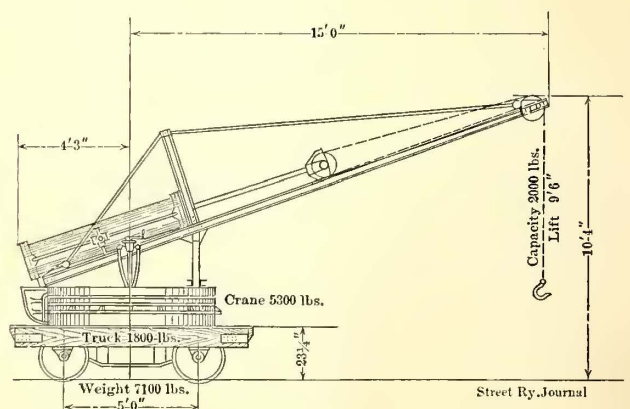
REVOLVING CRANE FOR HEAVY-DUTY
